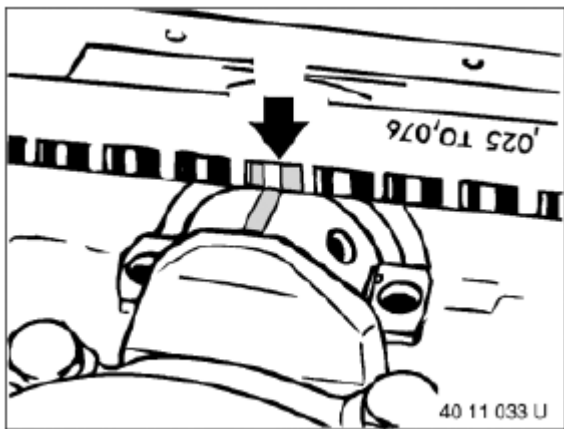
Measuring Conrod Bearing Play Width Flattened Plastic Thread
